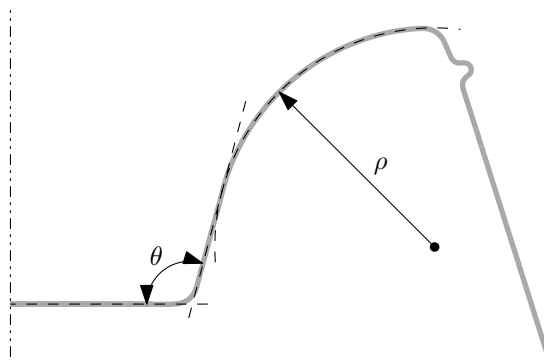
U-channel forming with drawbeads - System used to measure the springback and the sidewall curl.
